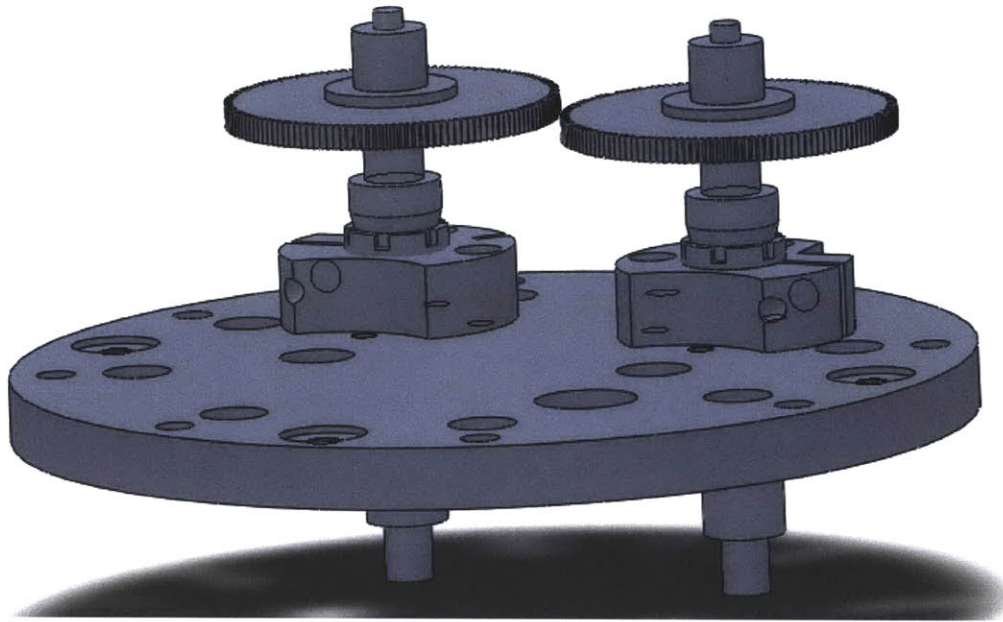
Remaining pieces of the secondary mirror mount that were reused and locked in place for flight.
